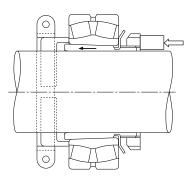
Removal of Adapter with Stop and Axial Pressure
